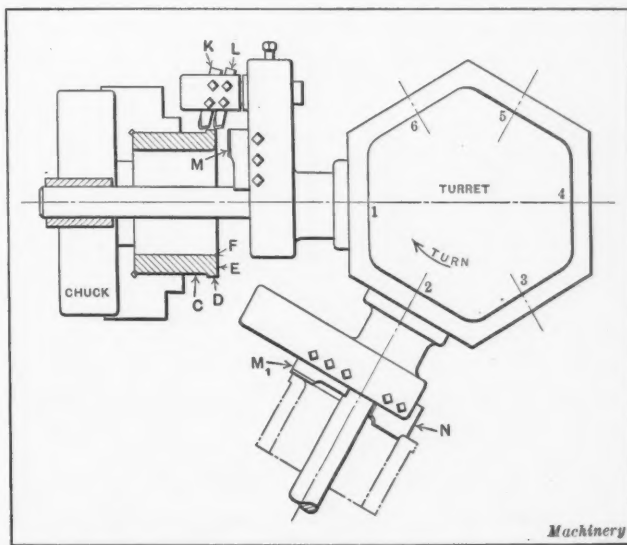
Tooling Lay-out for Second Operation on Forged Steel Bushing
